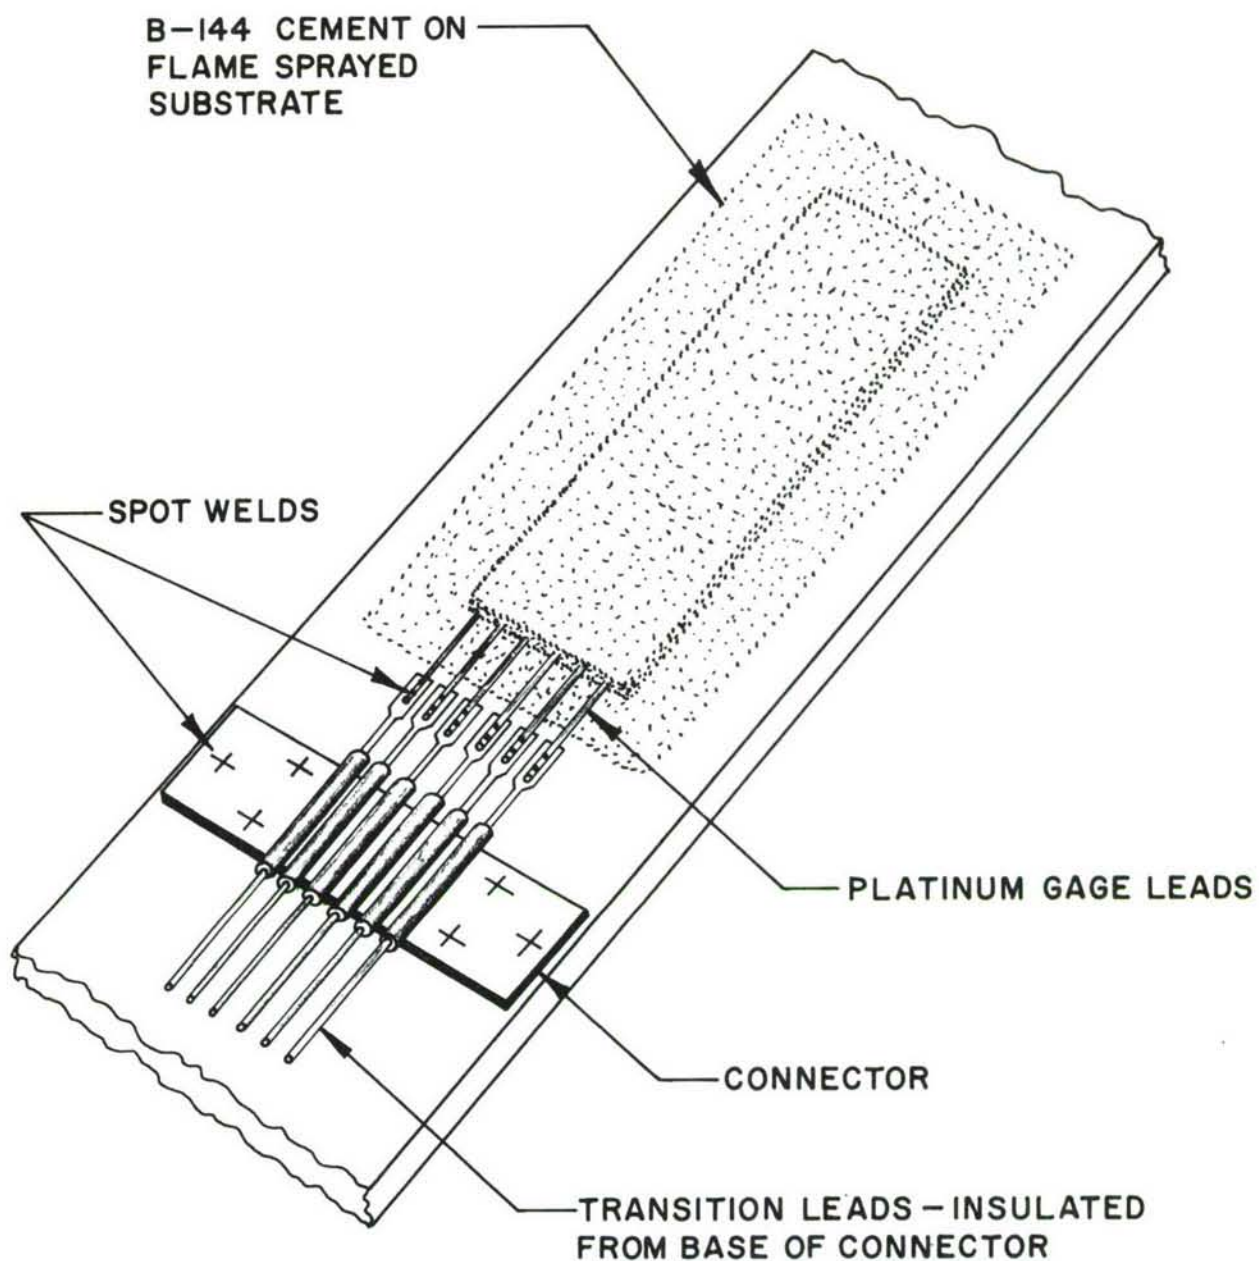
TYPICAL GAGE AND CONNECTOR
